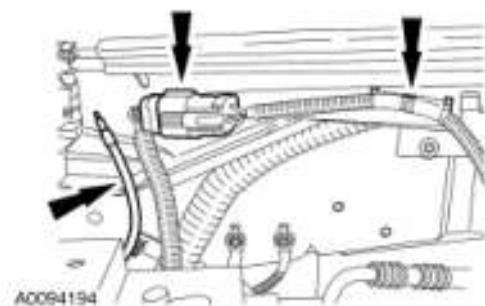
Attaching Wiring Harness And Windshield Washer Hose Retainers To Cowl Panel Extension
